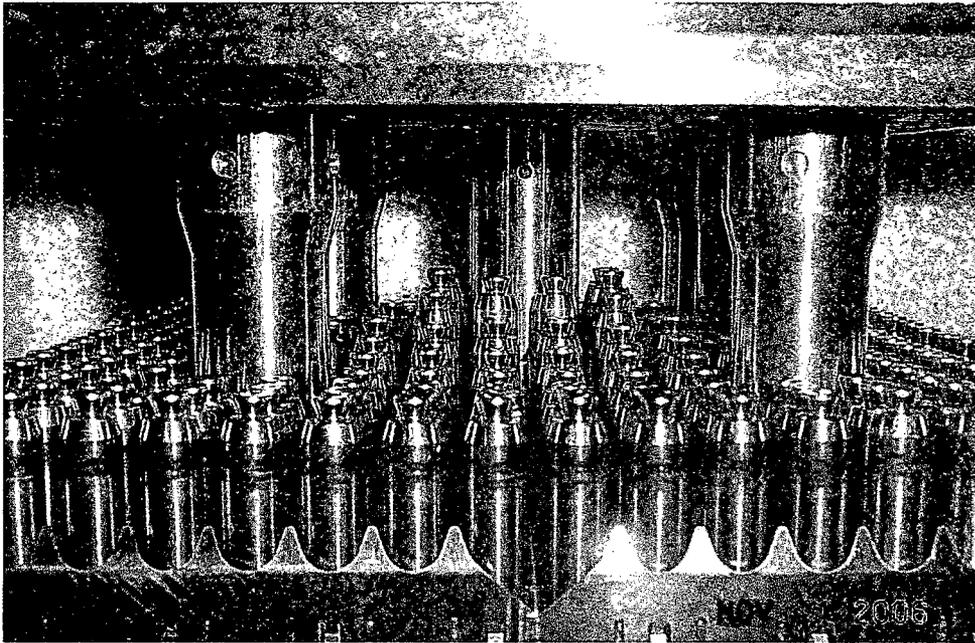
Upper end fitting assembly – flow plate, guide tubes, instrument housing, fuel rods, top grid
